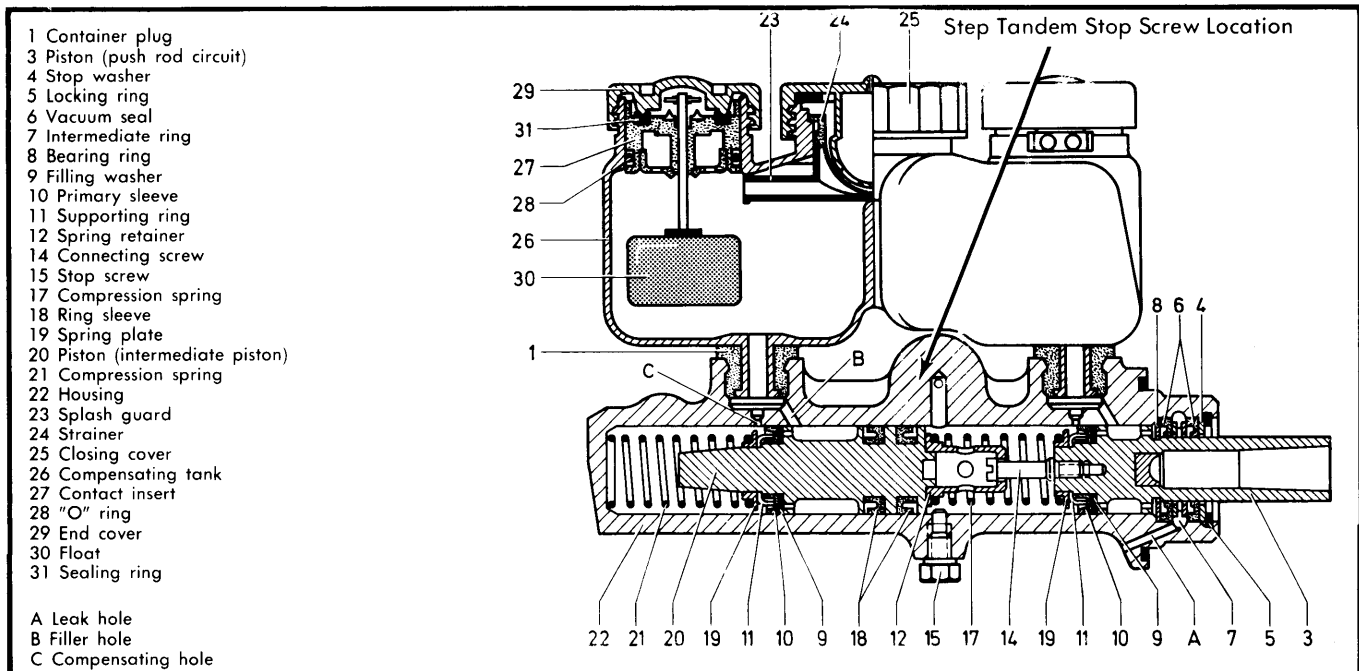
Sectional View of Late Model Mercedes-Benz Tandem Master Cylinder
